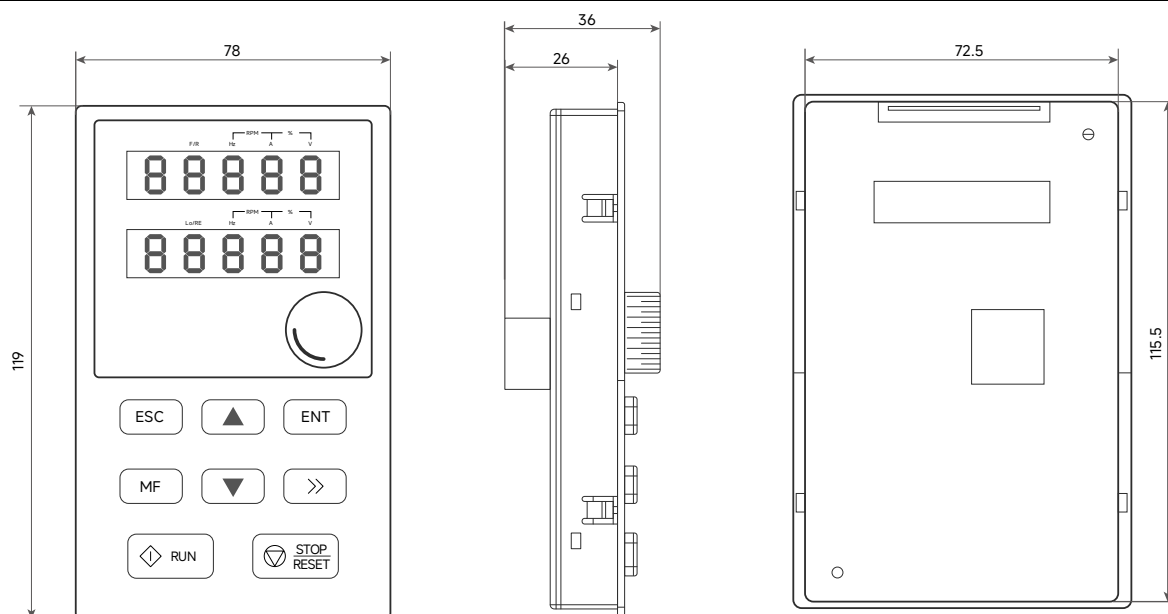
Appearance and dimensions of a keypad of 380V/30kW (220V/15kW) and above (unit: mm)
